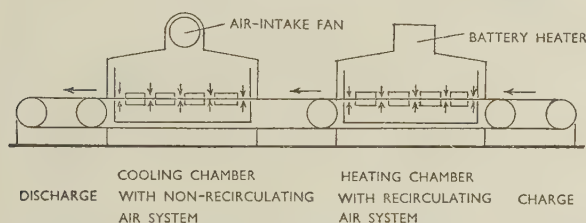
Schematic Drawing of Single-Sheet, Conveyor-Type Flash-Anneal Furnace (cf. Fig. 6, Plate LIII).
